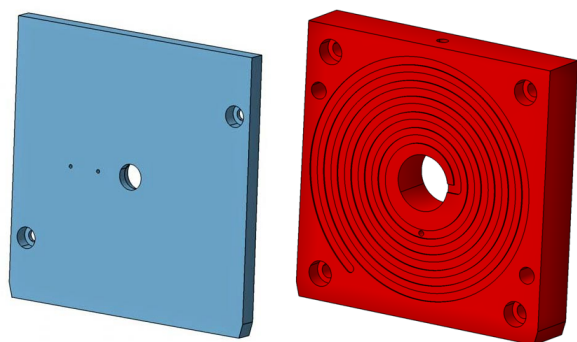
Cavity plates (left – testing plate, right – shaping plate)
